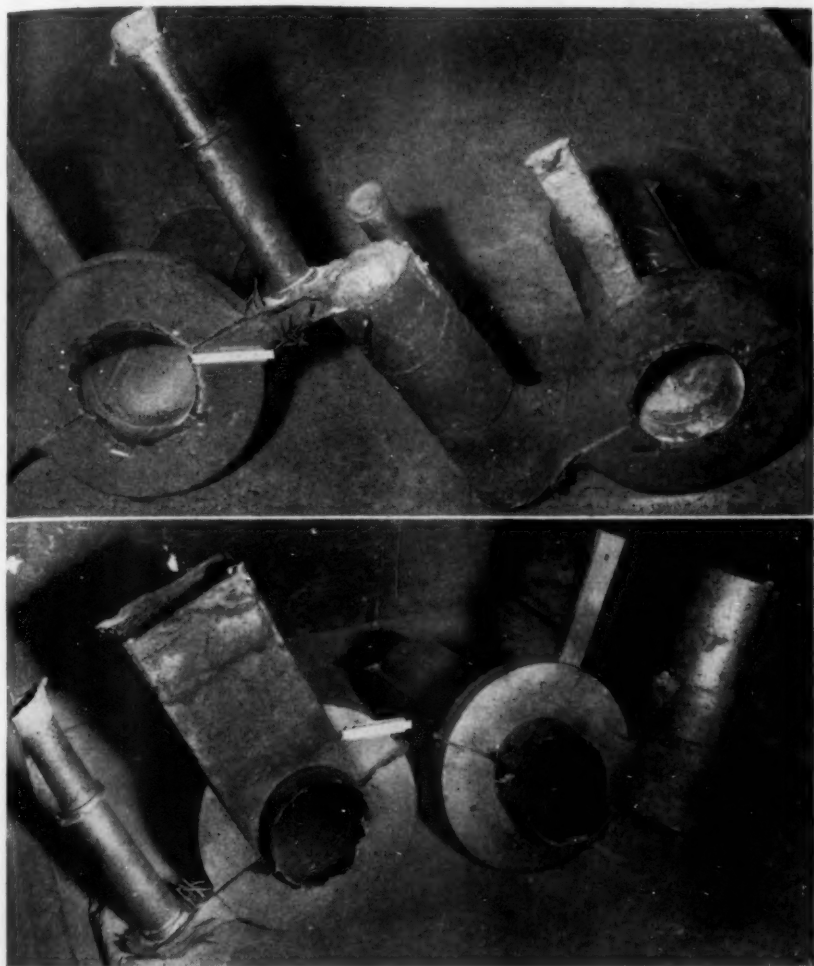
TOP—SINGLE-FLANGE FITTINGS, SHOWING POWDER INDICATIONS IN BORE. PLATE 11—BOTTOM—SINGLE-FLANGE FITTINGS, SHOWING VEINS IN TWO DIFFERENTLY GATED AND RISERED SPECIMENS.
